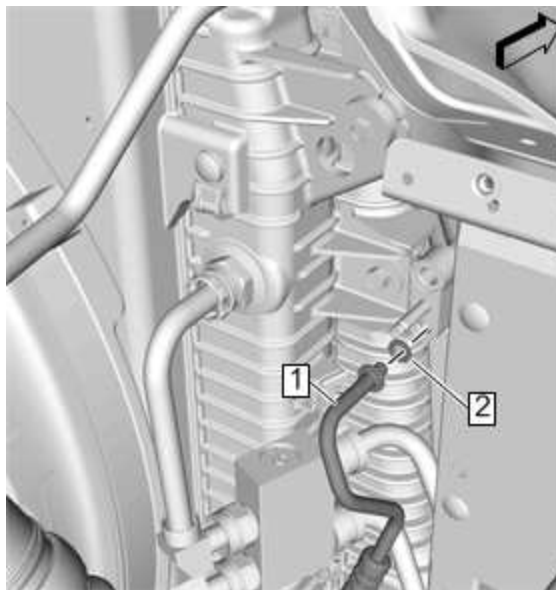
Air Conditioning Evaporator Tube And Air Conditioning Condenser
